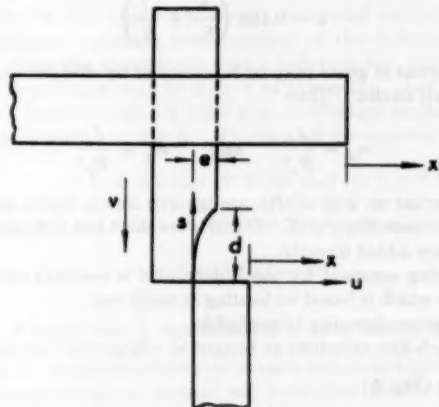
CONSTANT-ACCELERATION CAM USED TO REPRESENT ACTION OF TOOTH ERROR AT INSTANT OF TOOTH ENGAGEMENT
